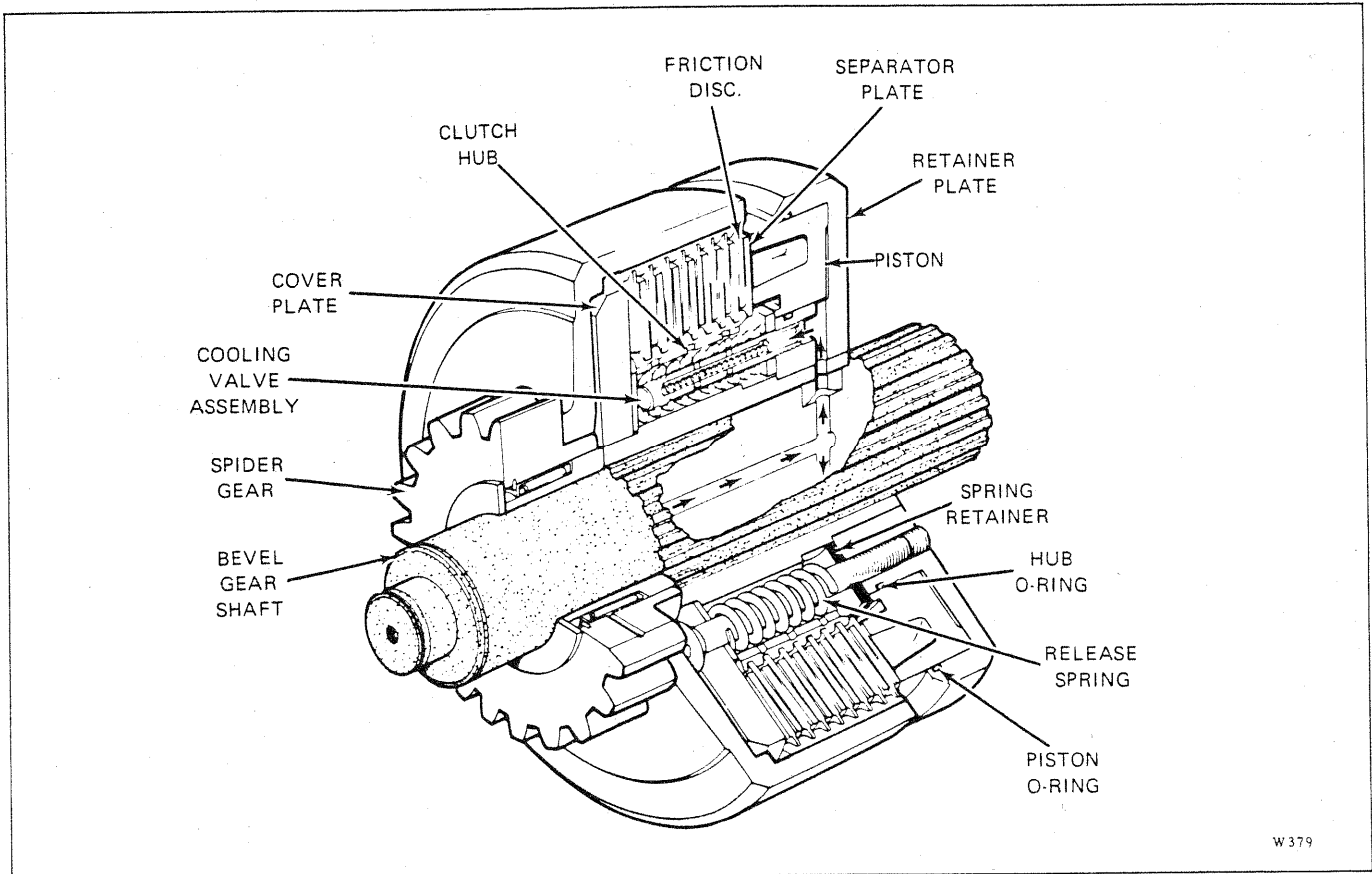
OIL CLUTCH ASSEMBLY, POWER CONTROLLED WINCH
